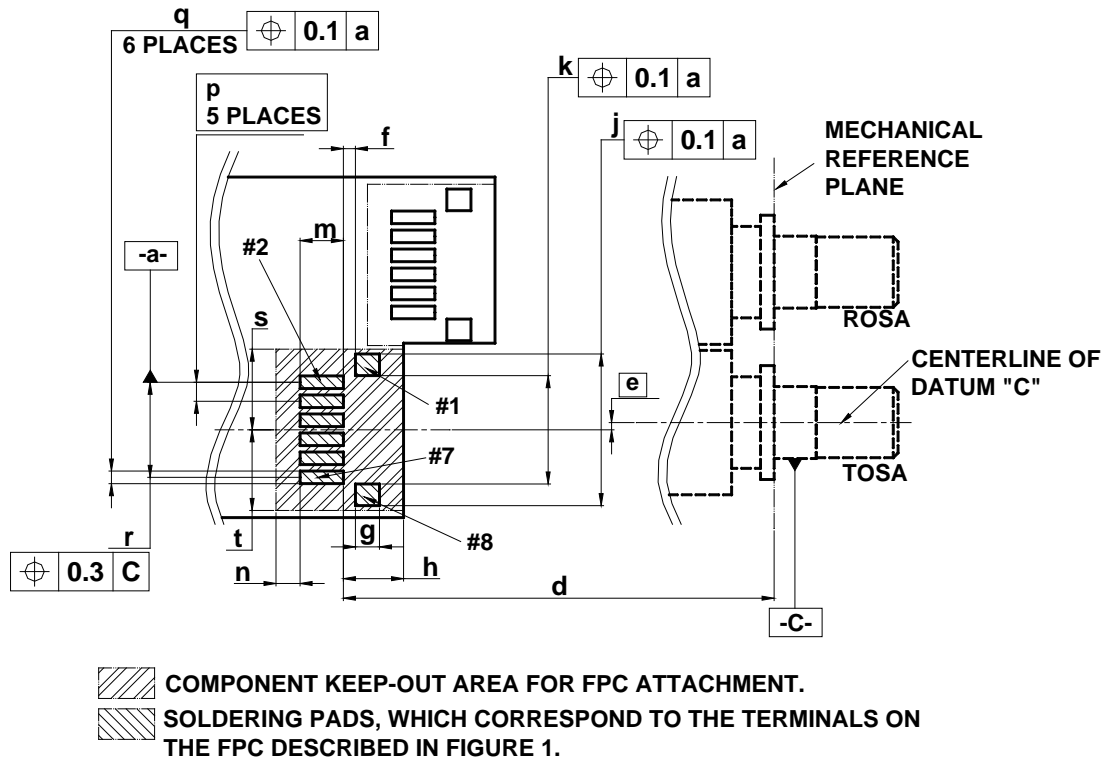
Recommended pattern layout for the PCB in a CFP or QSFP+ package transceiver
